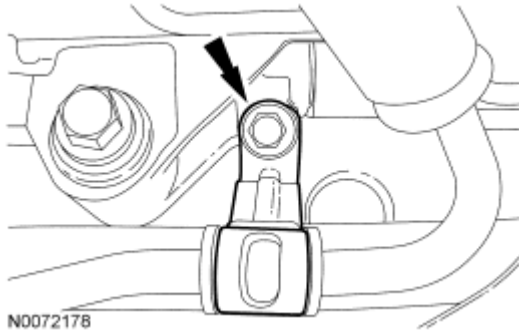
Identifying PSP Bracket-To-Steering Gear Bolt
